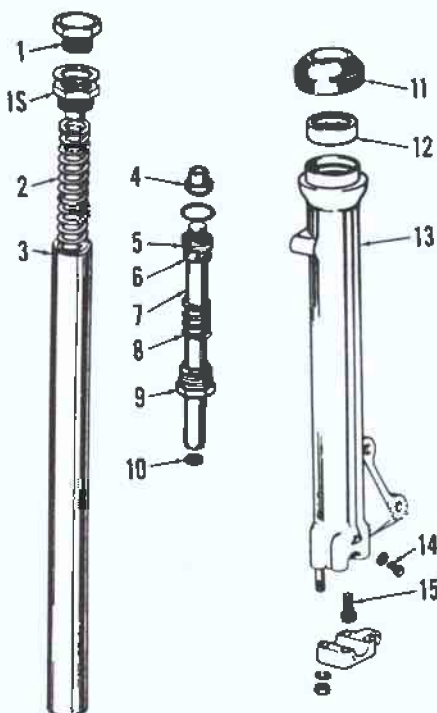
Exploded view of front suspension unit used on late models.
